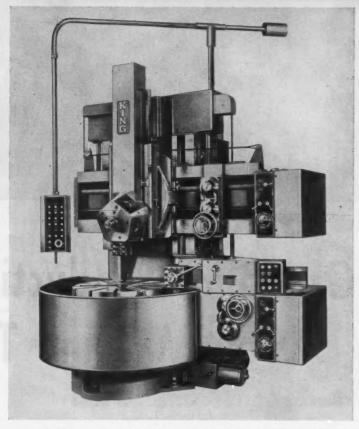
Single-column 36-inch King vertical boring and turning machine.
